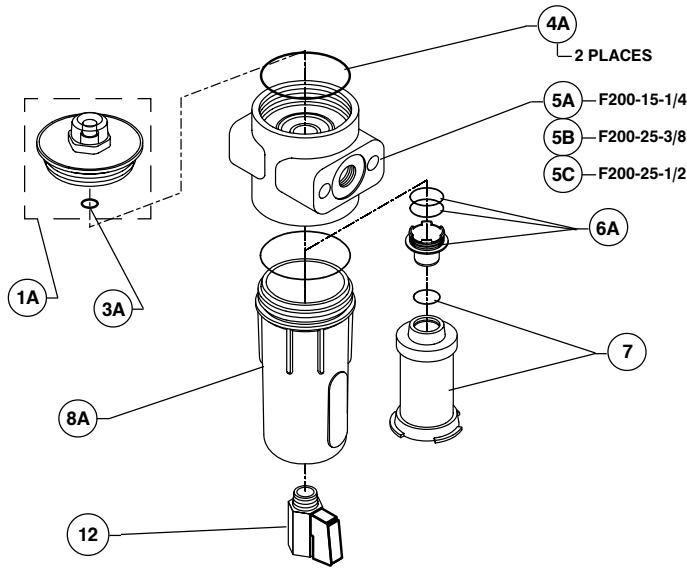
B F200-55-1/2 THRU 500-2 REPLACEMENT PARTS
